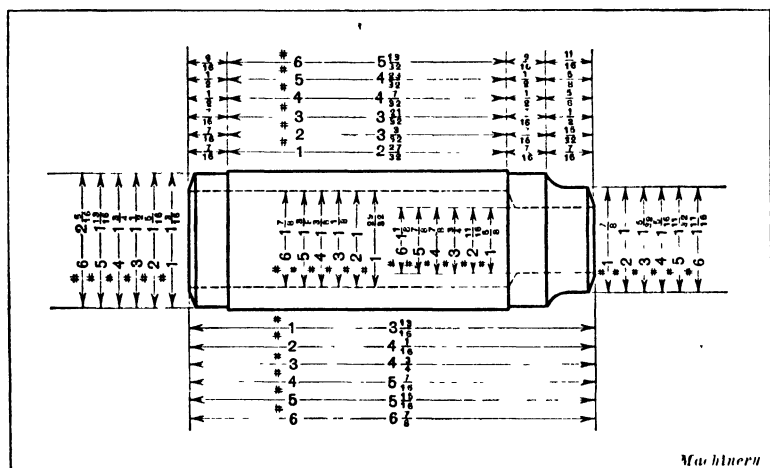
Dimensions on One Drawing for Parts of Different Sizes
